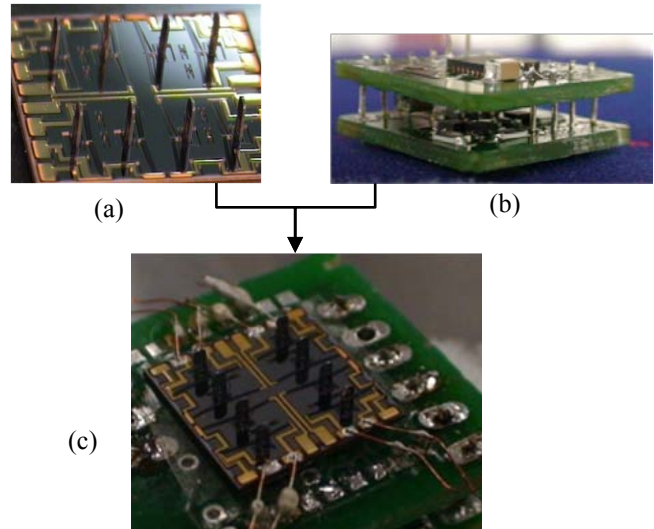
Micromanufacturing sequence: (a) Microassembly of robot legs (b) Power electronics backpack assembly; (c) Wire bonding.
